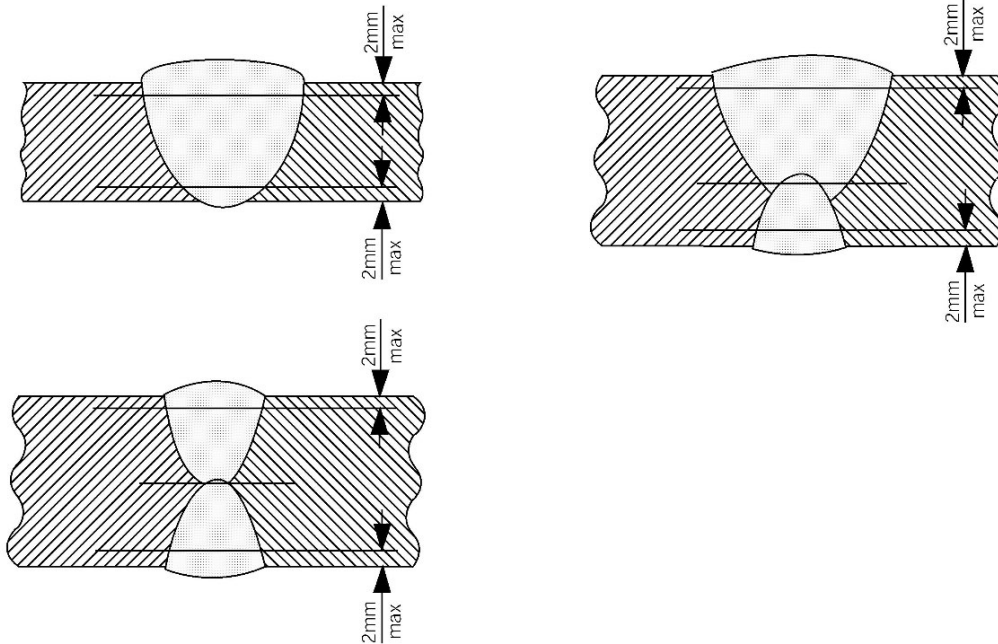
Examples of hardness test with rows of indentations (R) in butt welds
